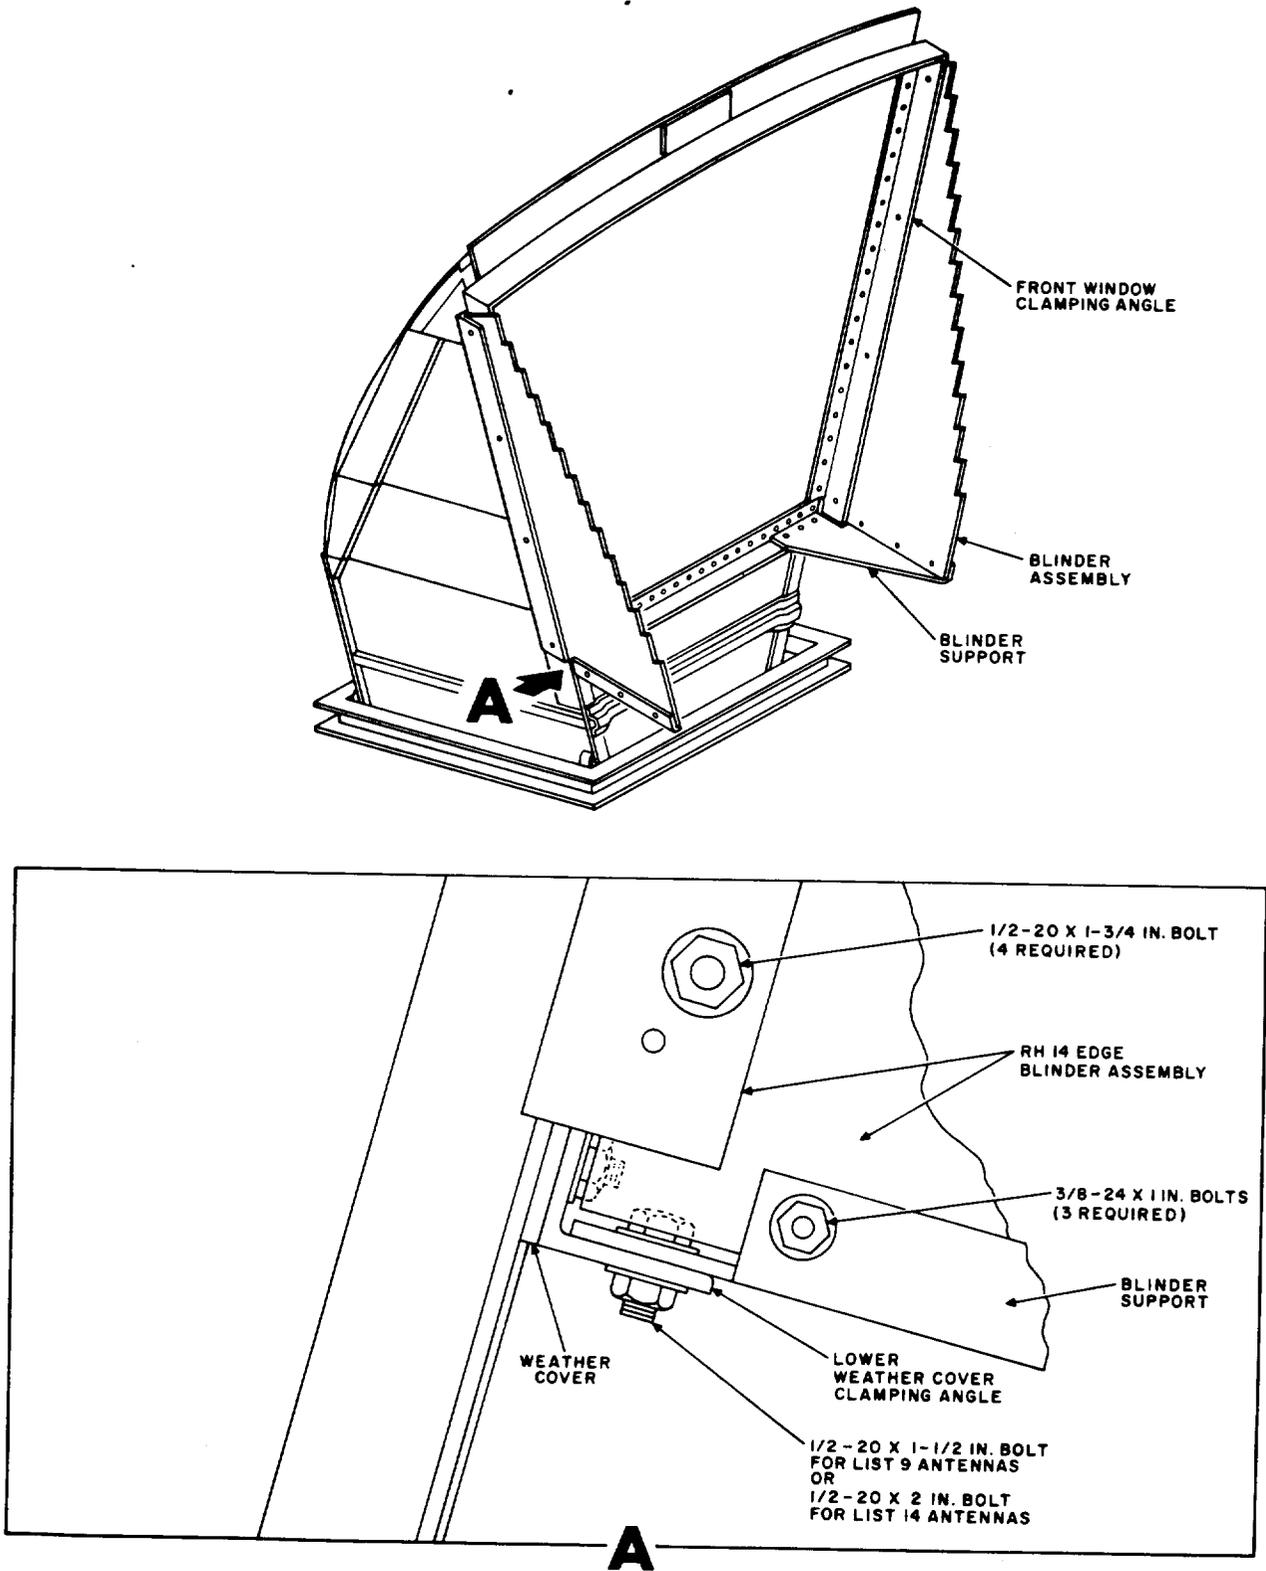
Side View of KS-15676 Antenna With 14 Edge Blinders
